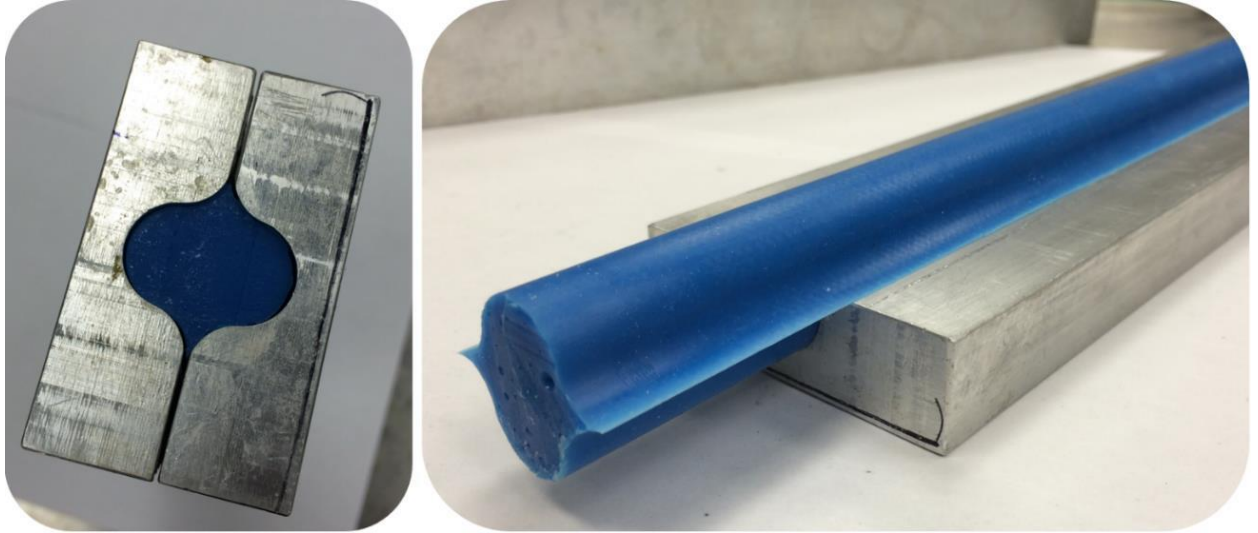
Silicone Mold Forming for Whole Boom Fabrication
